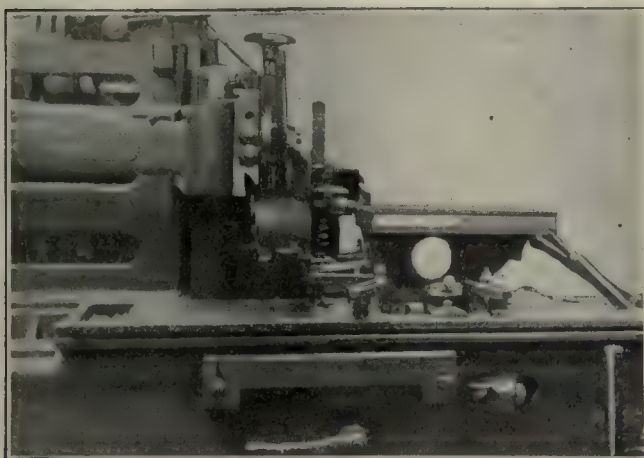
FINISHING SLIPPERS ON PLANING MACHINE
